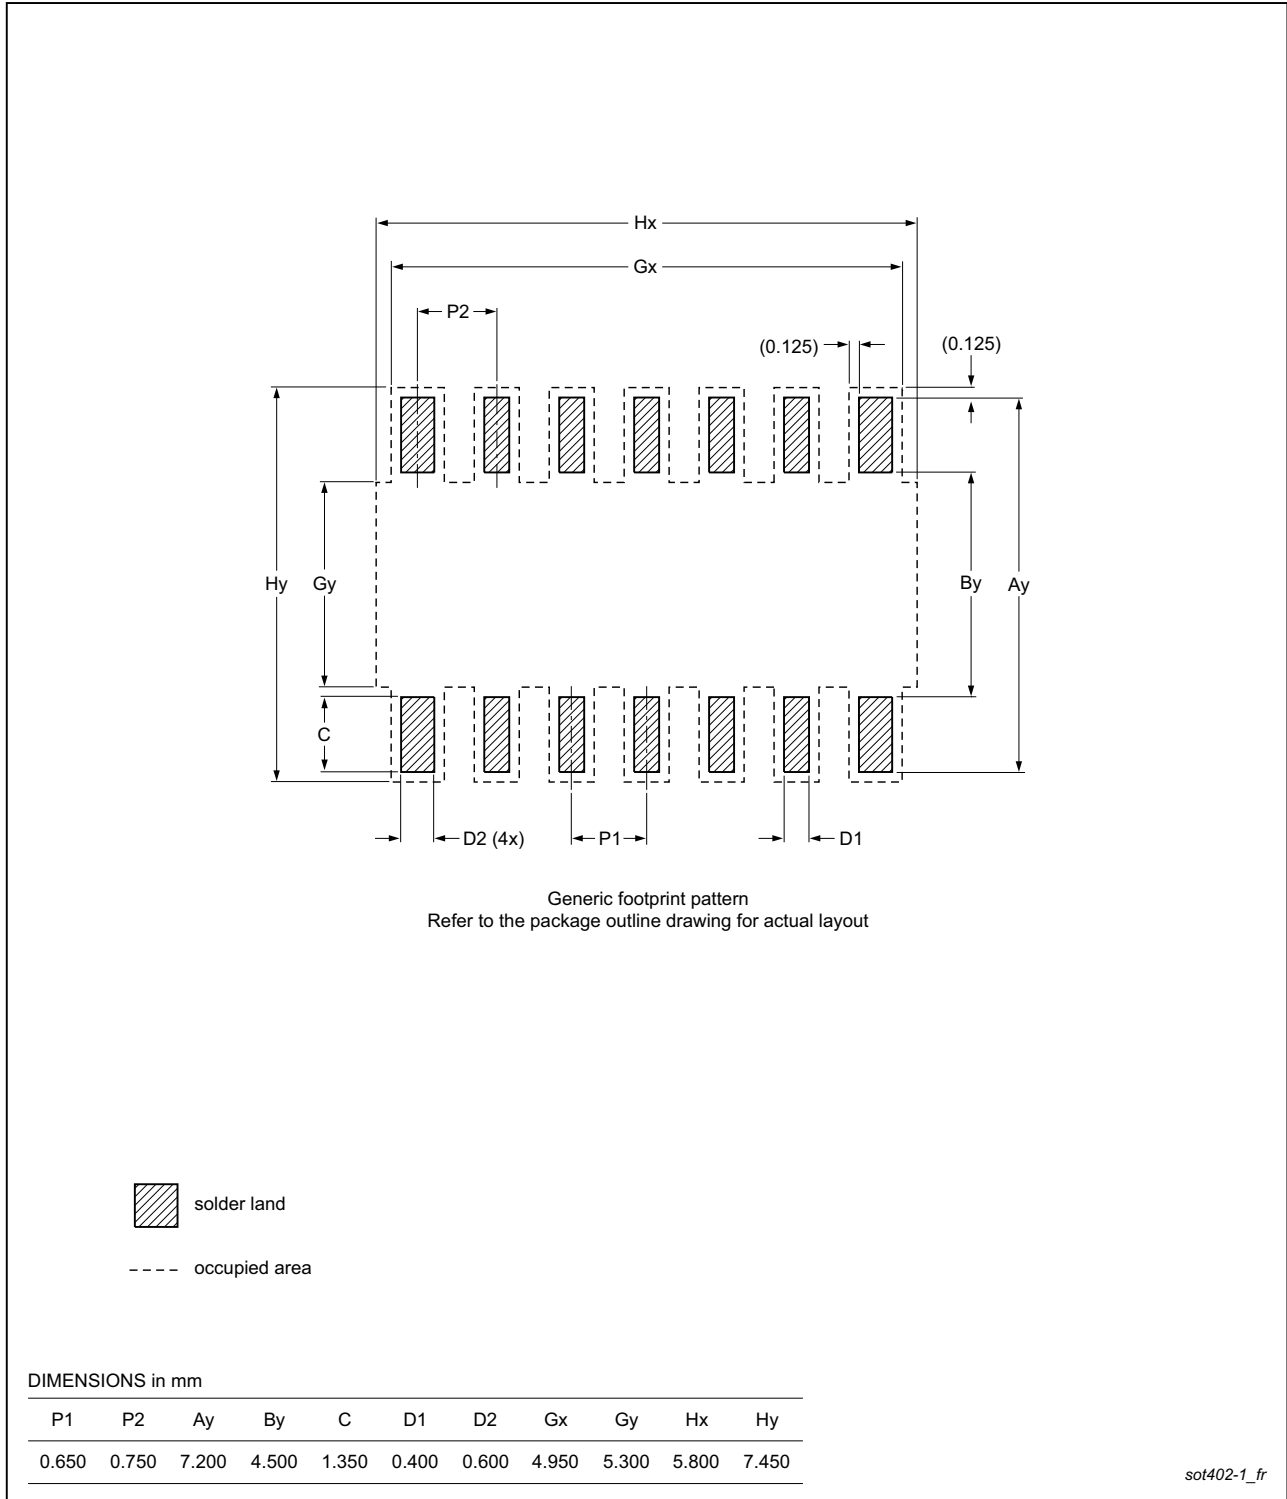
PCB footprint for SOT402-1 (TSSOP14); reflow soldering
